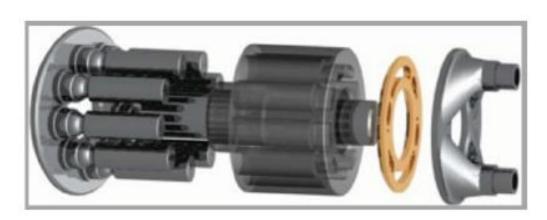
Axial Piston Pump/Motor (Schematic View).
